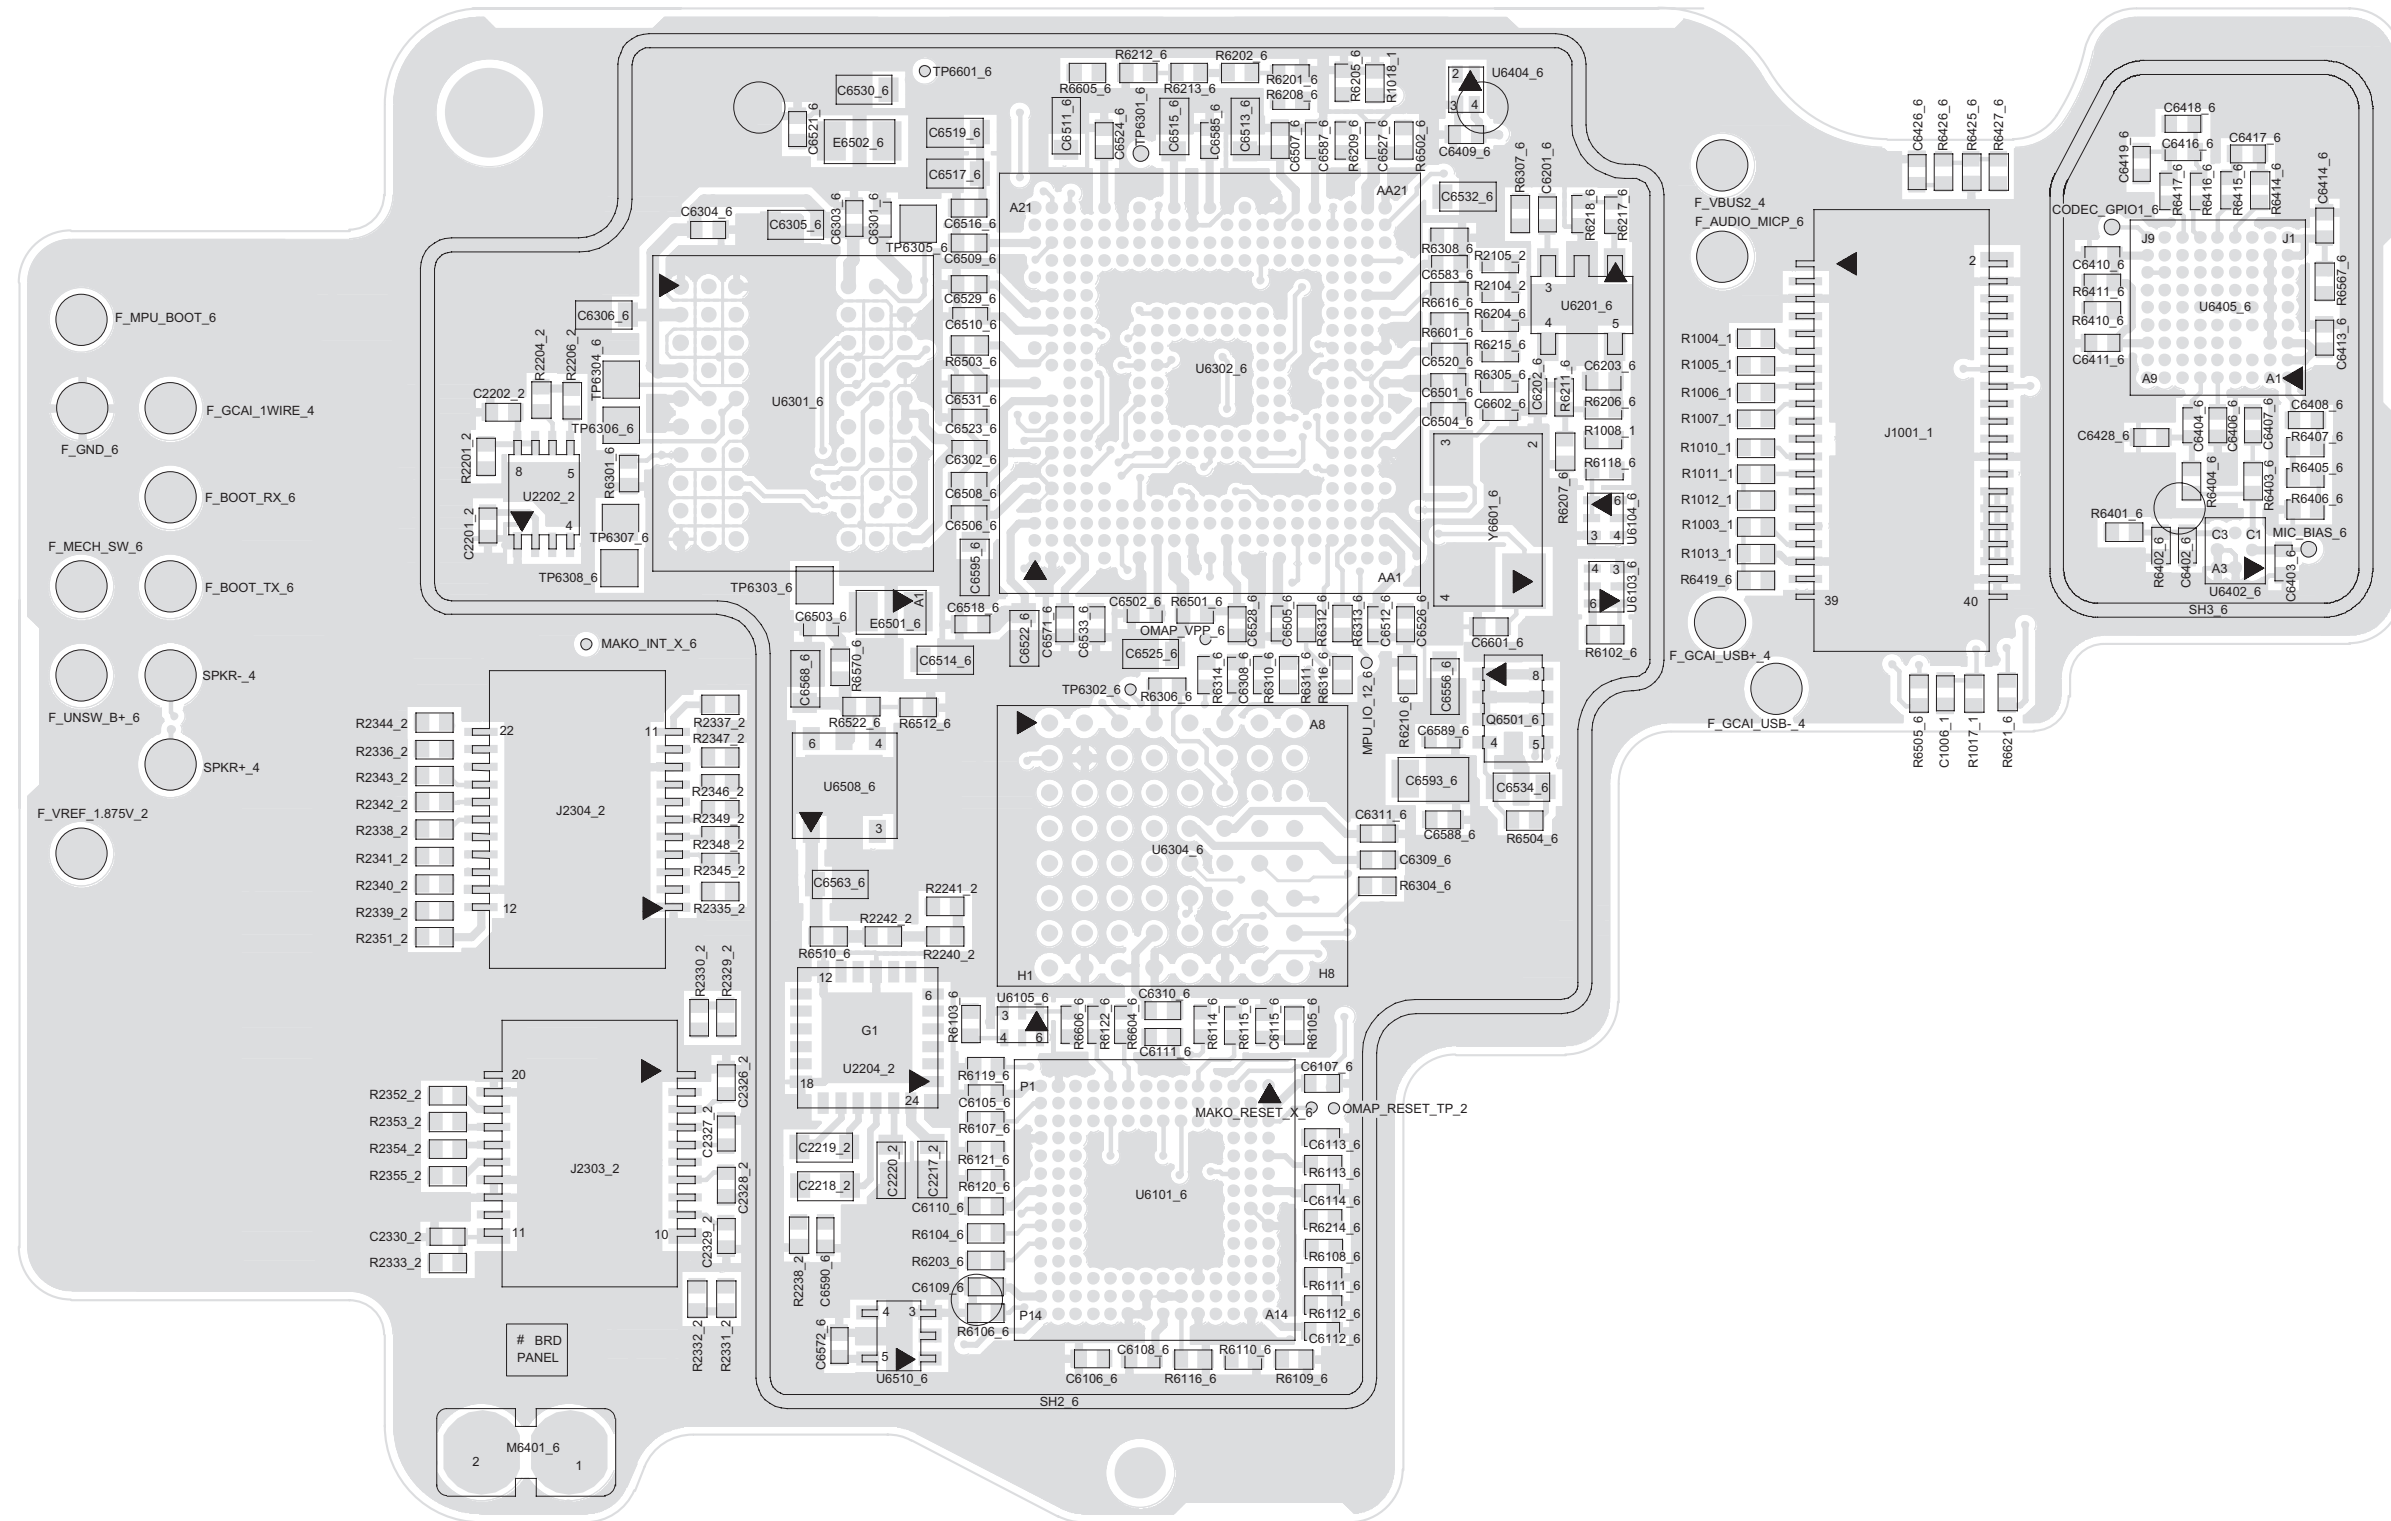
HLN5979B Controller Board Layout – Side 1
